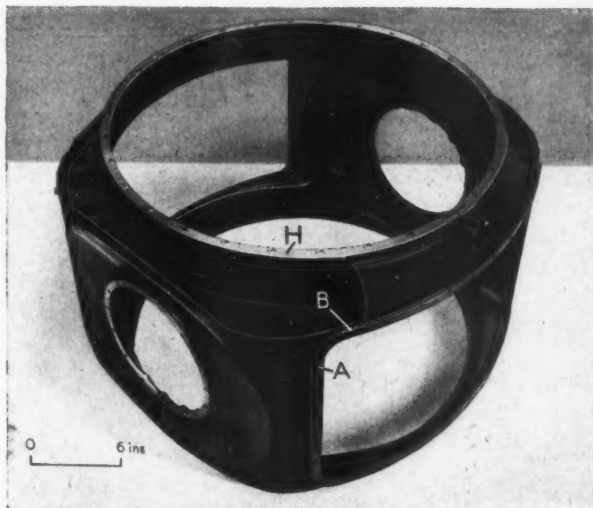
A Nimonic welded assembly which forms the thrust reverser box for the Rolls-Royce Avon gas turbine engine is here seen in the partly machined condition
